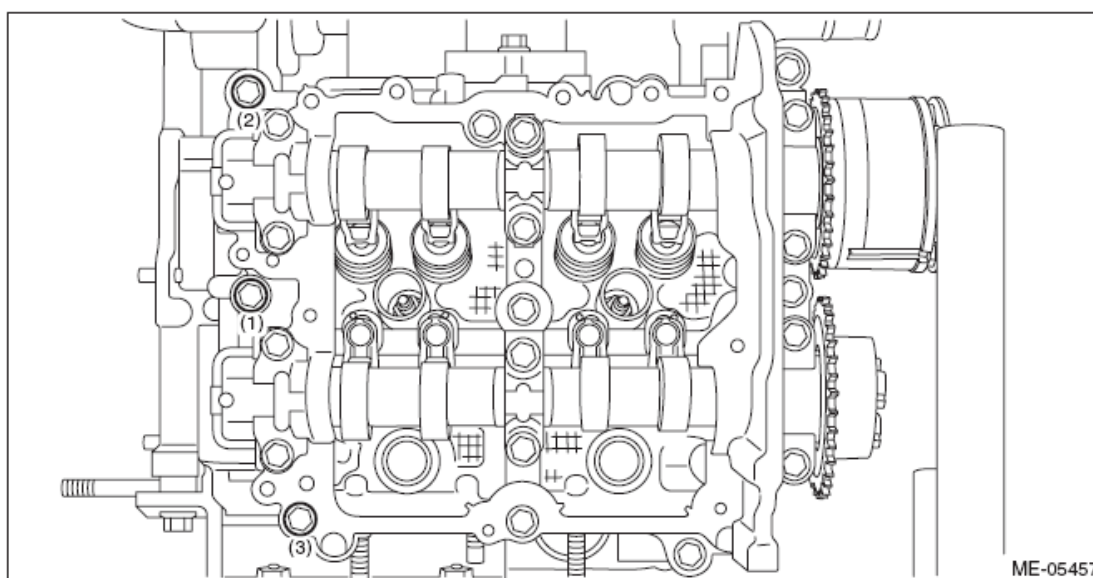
Identifying Cam Carrier Bolts Tightening Sequence
